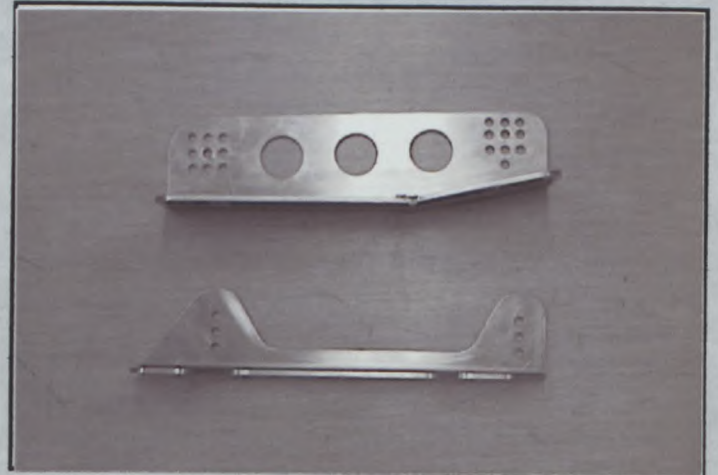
SEAT BRACKET (Co Dr.SIDE)
